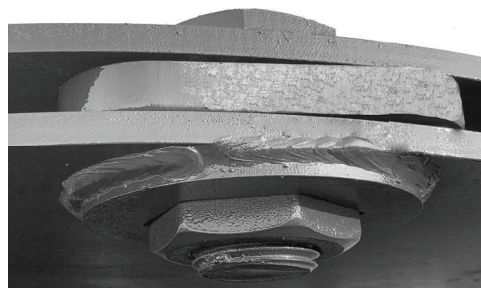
Bolt Head Bead Weld & Assembly
